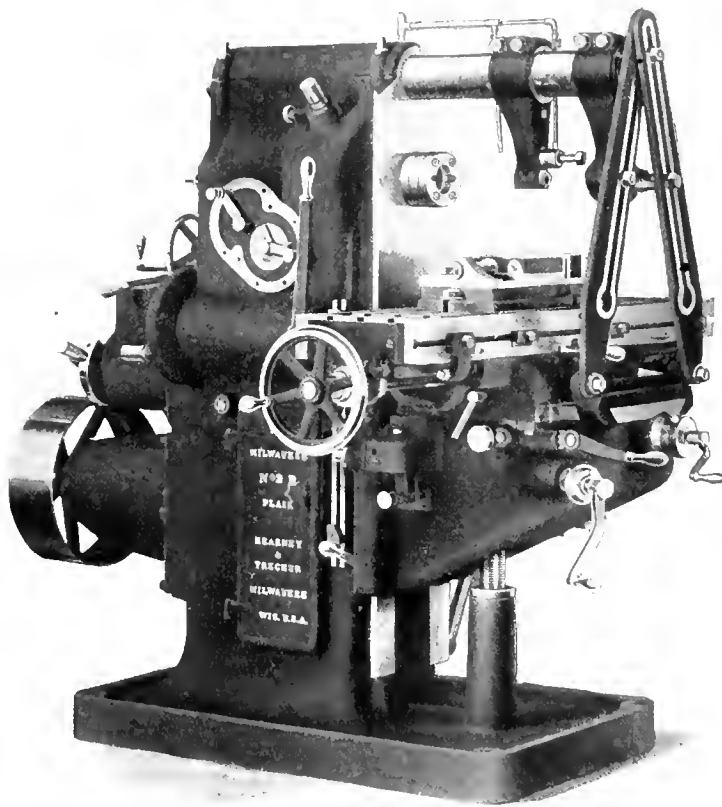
Milwaukee No. 2B Plain Milling Machine, with Geared Drive and Feed
